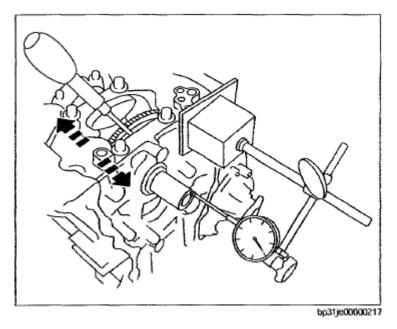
Measuring Crankshaft End Play Using Dial Gauge
